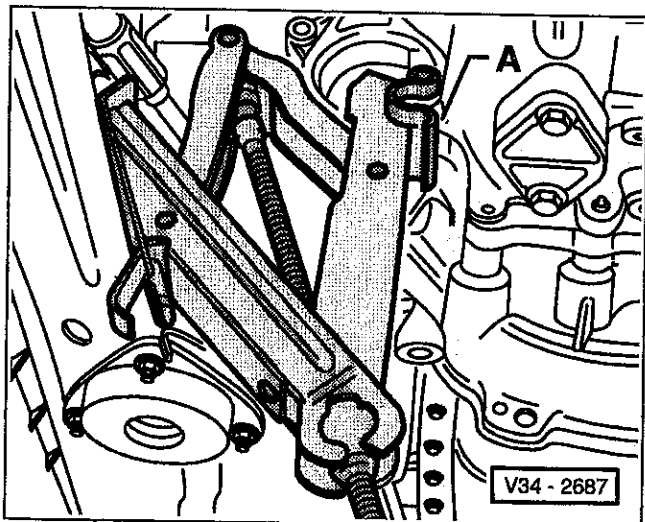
Scissors jack being used to press engine/transmission assembly rearward. Be sure to mount scissors jack to engine at casting lug (A).
